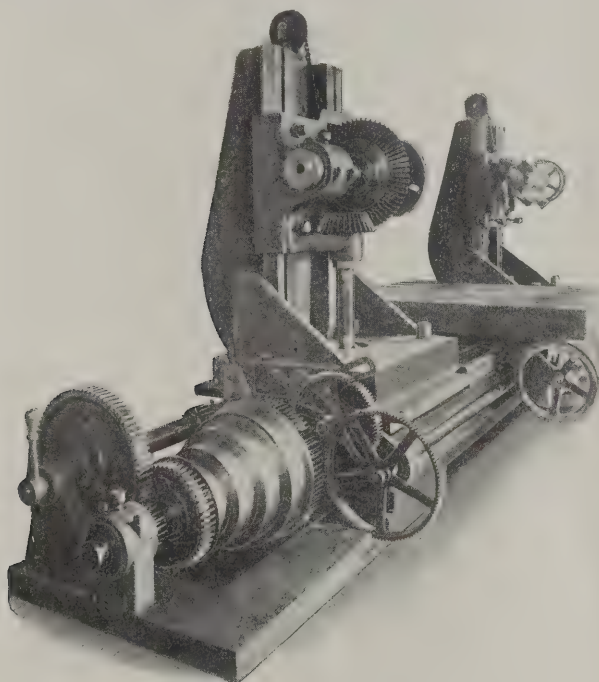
Driving Mechanism of New Haven Boring Machine.
